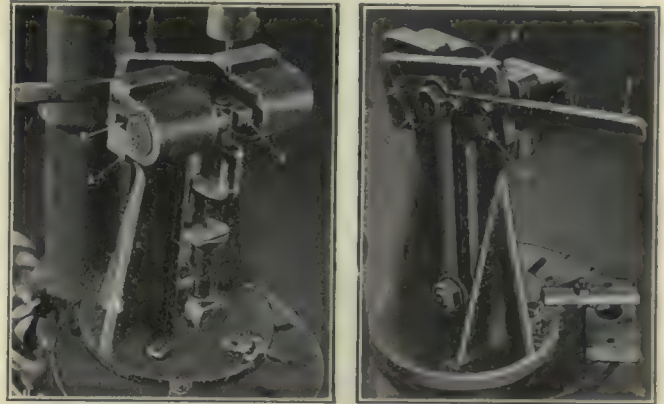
CENTERING AIR DRILL CRANKSHAFTS. FIG. 12—VIEW SHOWING OPERATION OF FIXTURE
